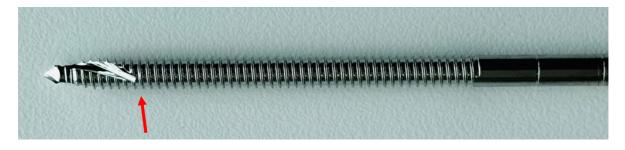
Full thread of drill pin (red arrow points to the first full thread)
